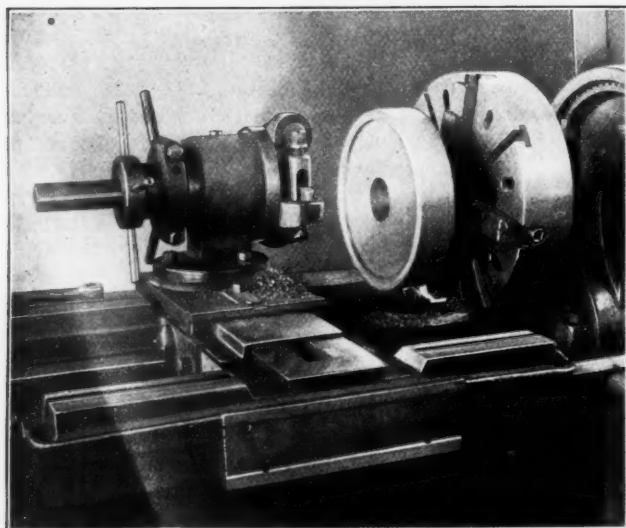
Turret Toolpost set up on a Lathe for turning Operation
